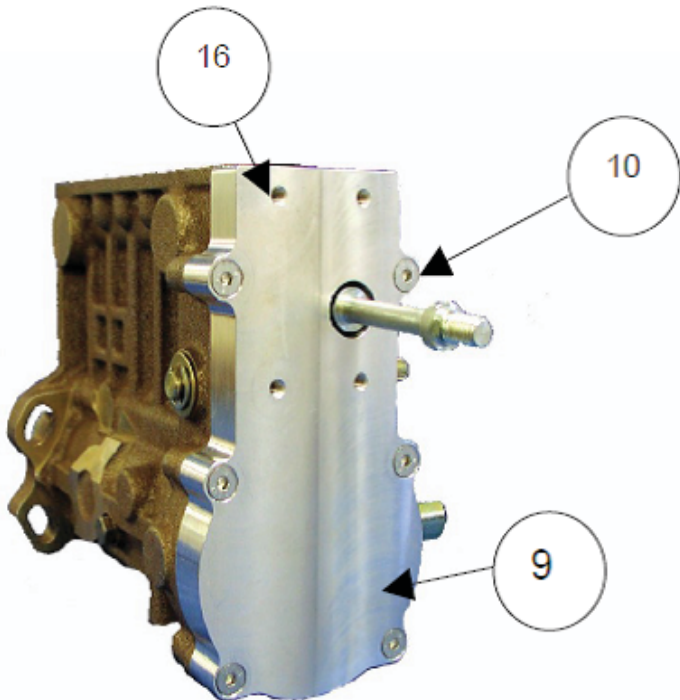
Link Sub Assembly From KT289 (Shown w/o Nut)
